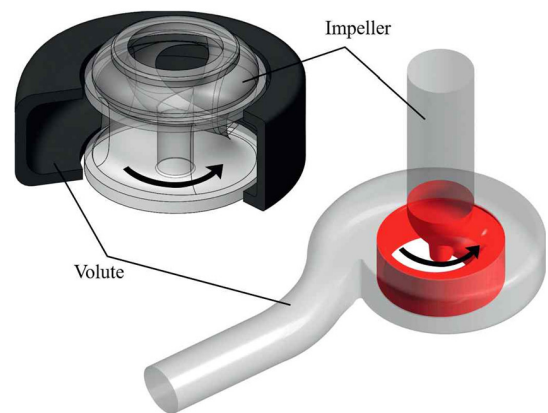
Three-dimensional single-channel pump impeller and volute⁴⁾
